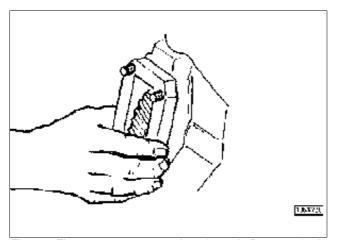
Fit no. 5.9030.634.0 tool as shown in figure to obtain thorough concentricity between sealing ring and crankshaft as well as a full coplanarity of the external application fixing faces, then fully tighten the timing case securing screws. Remove the tool;
